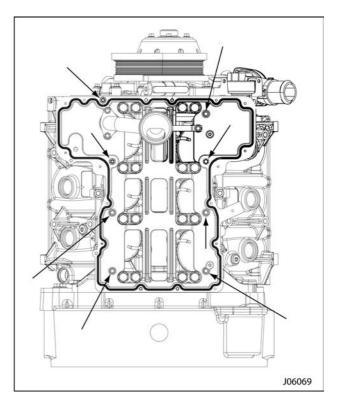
Upper oil pan mounting bolts (stripped chassis)
